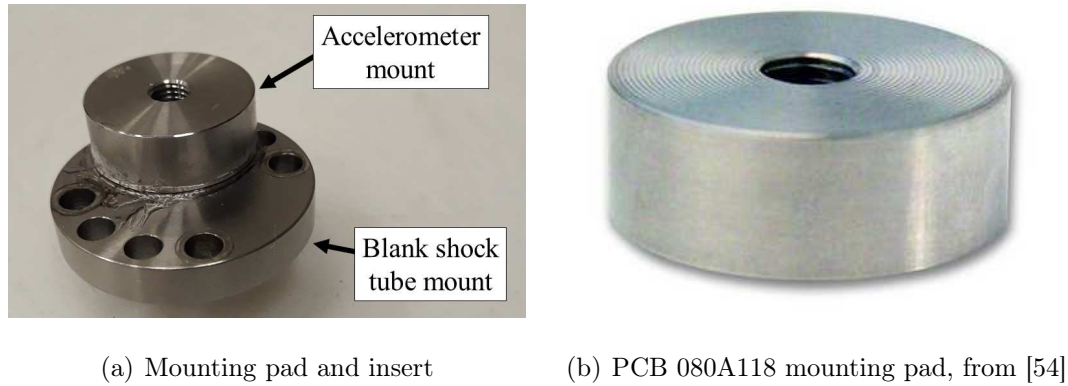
Mounting pad and insert used for accelerometer testing.
